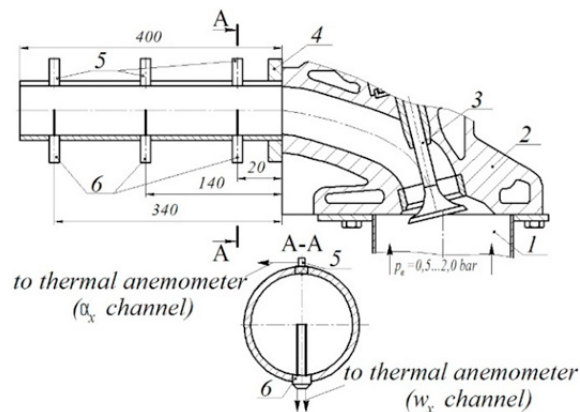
The exhaust system of the experimental setup: 1 – engine cylinder; 2 – cylinder head; 3 – exhaust valve; 4 – exhaust pipe; 5 – thermal-anemometer sensor to determine the local heat transfer coefficient; 6 – thermal-anemometer sensor to determine the velocity of flow
